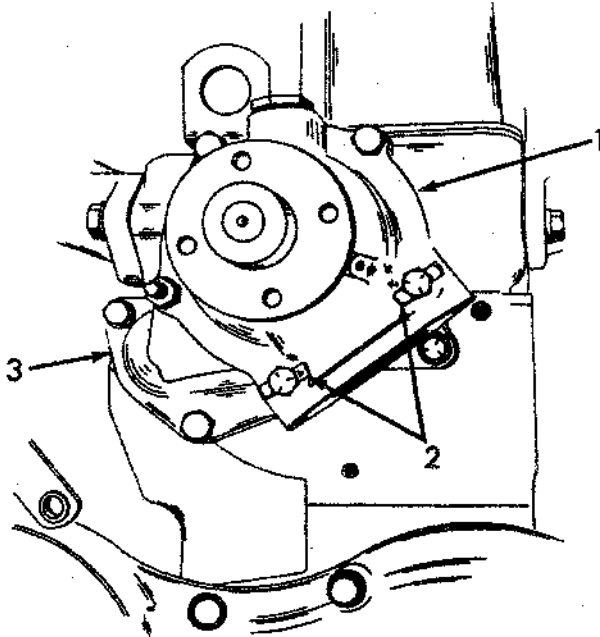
Water Pump and Capscrew Location (T-51283)
